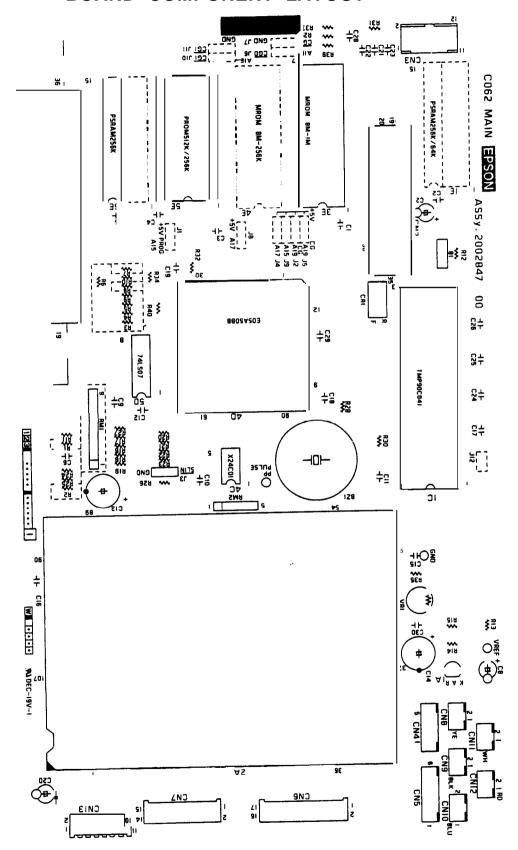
BOARD ASSY., MAIN (C062 MAIN Board) Component Layout
